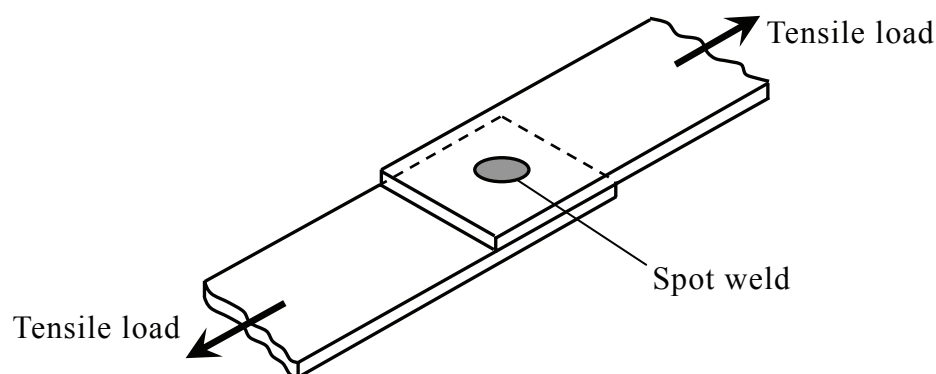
Schematic illustration of tensile-shear testing on spot welded joint.
